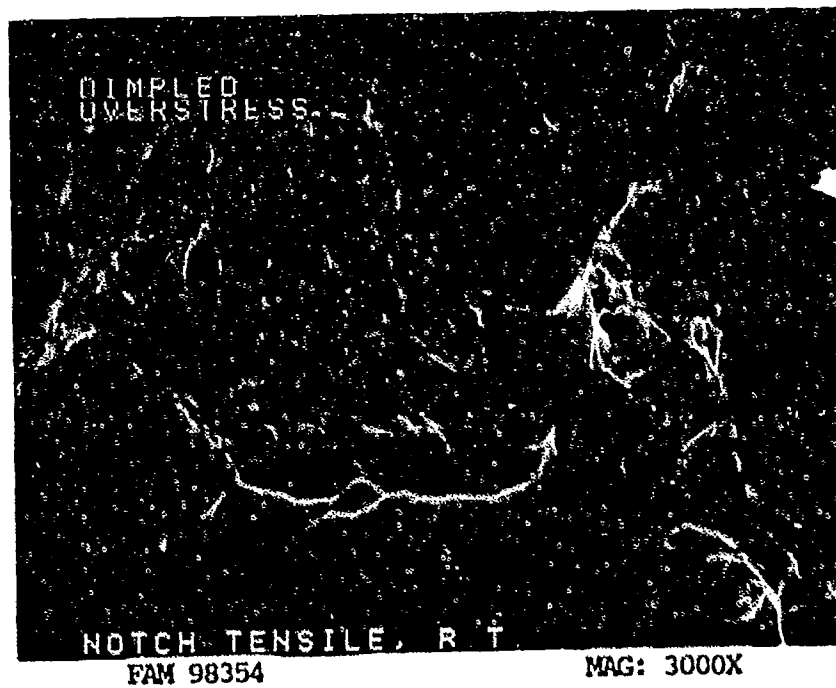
Higher magnification photograph of the area shown in Figure 9-21, showing equiaxed dimples in the primary fracture area.
